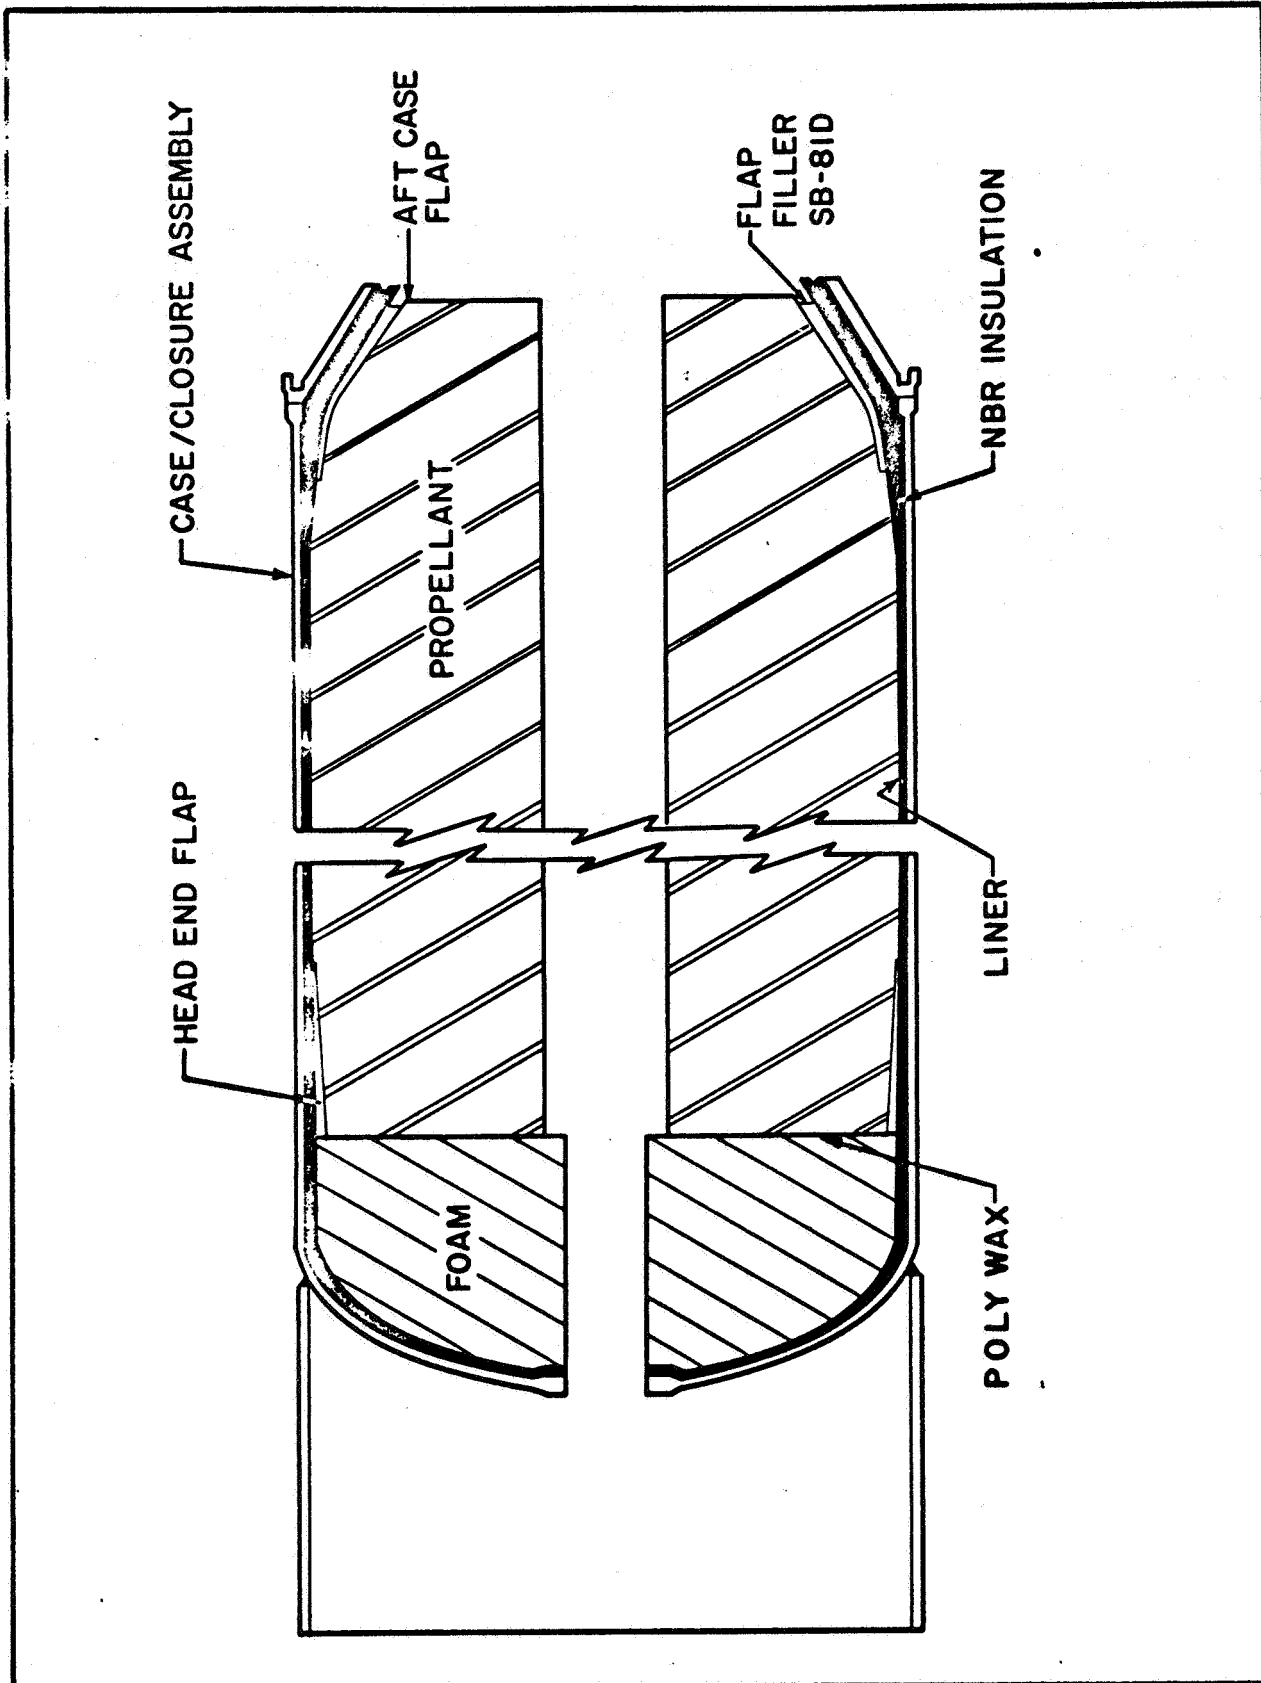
Sectional View of the 65-SS-1 Static Test Motor
